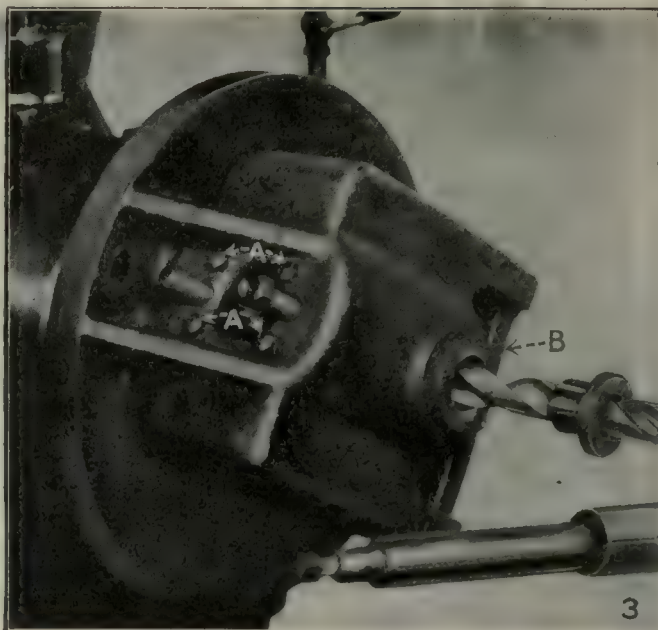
FIXTURE FOR DRILLING PISTON-PIN HOLE
